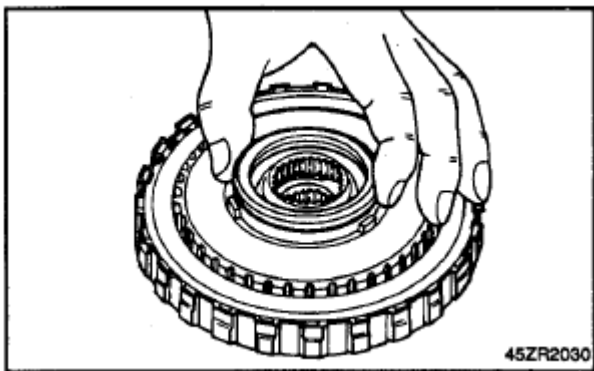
Attaching Thrust Bearing To End Clutch Hub
